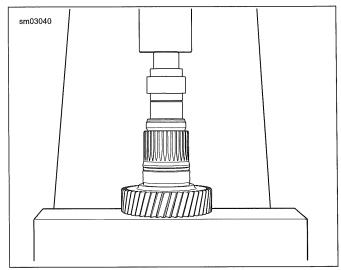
Installing Outer Needle Bearing in Main Drive Gear
